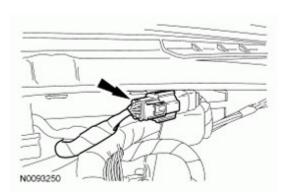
Locating Electrical Connector Courtesy of FORD MOTOR CO.
